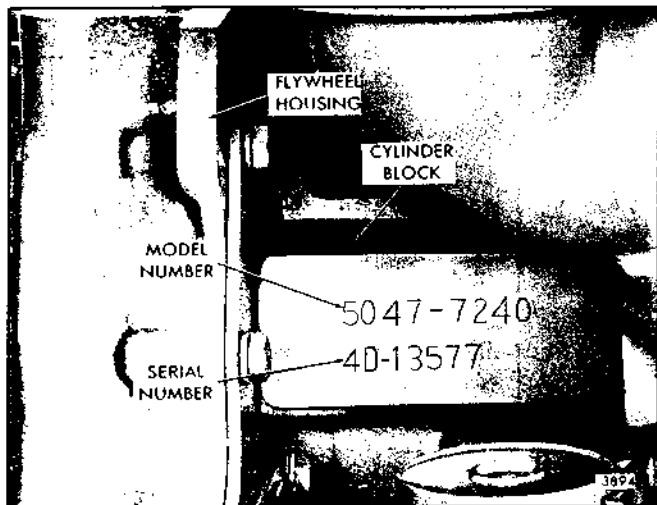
Typical Model and Serial Numbers as Stamped on Cylinder Block (In-Line Engine)
